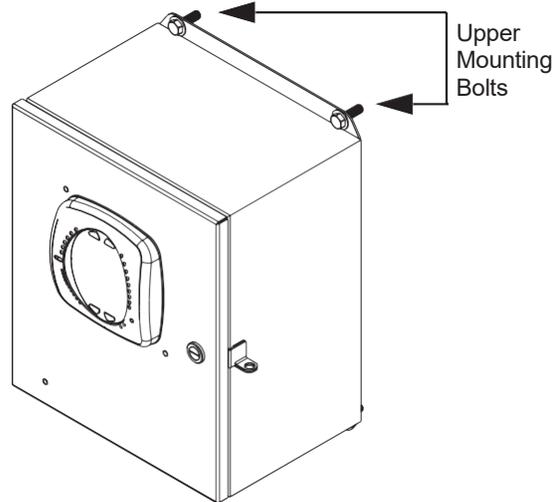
NEMA 1 Mounting Bolt Installation, Upper Bolts
